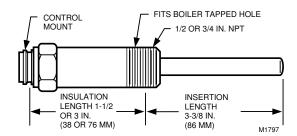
Immersion well dimensions. (Refer to form 68-0040, Wells and Fittings for Temperature Controllers, to order well.)
